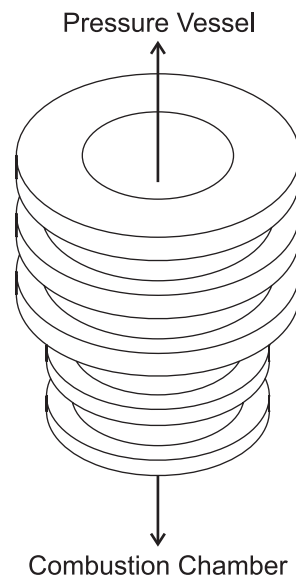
Piston-Injector part which forms the bottom of the pressure vessel and injector into the combustion chamber
